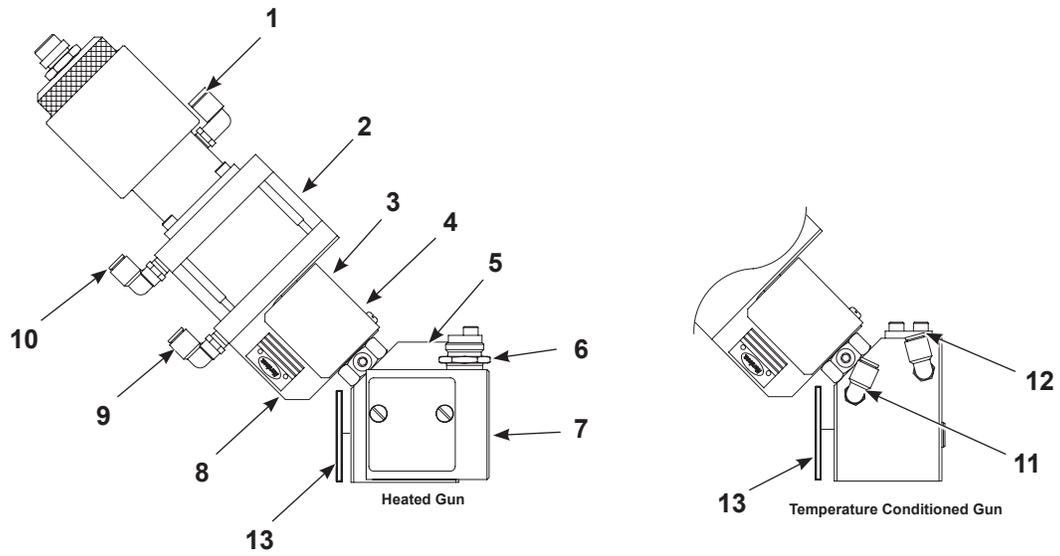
Removing the CE20 Gun from the Mounting Fixture (Typical)
